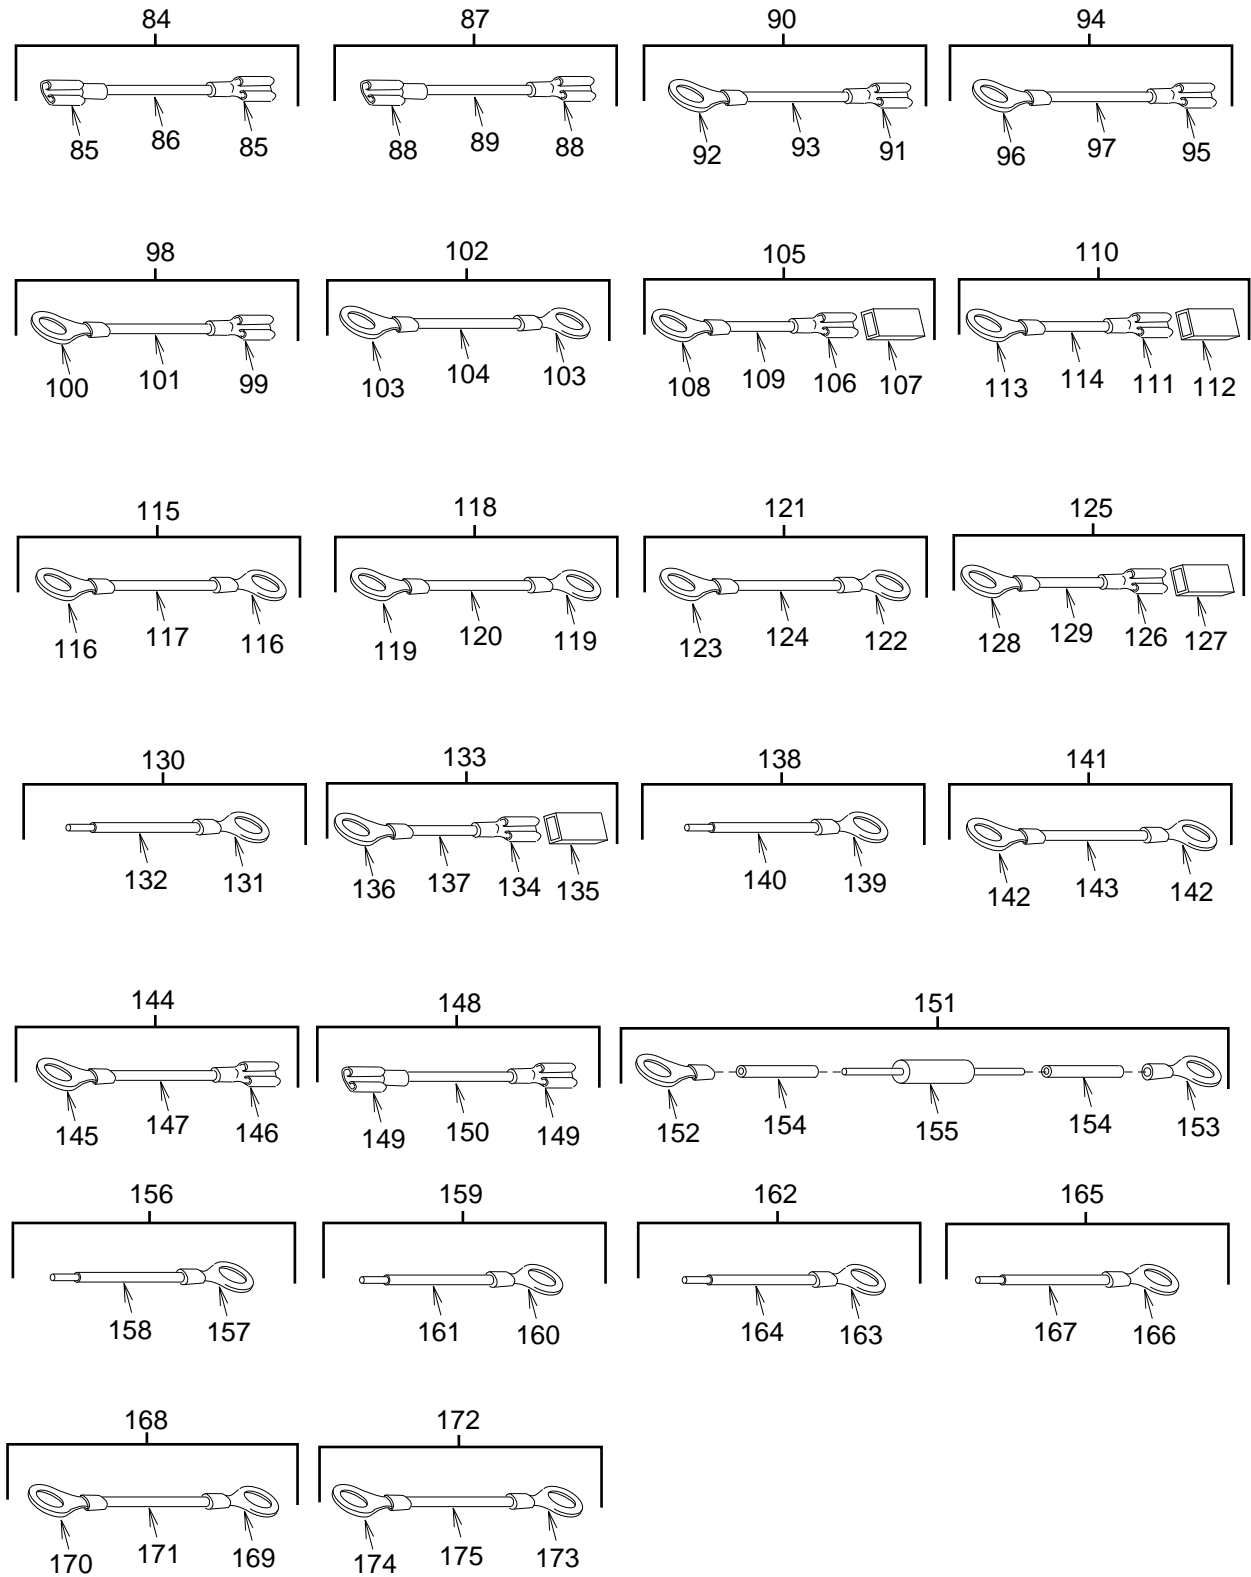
Control Box Wires and Cables (Sheet 2 of 2)
